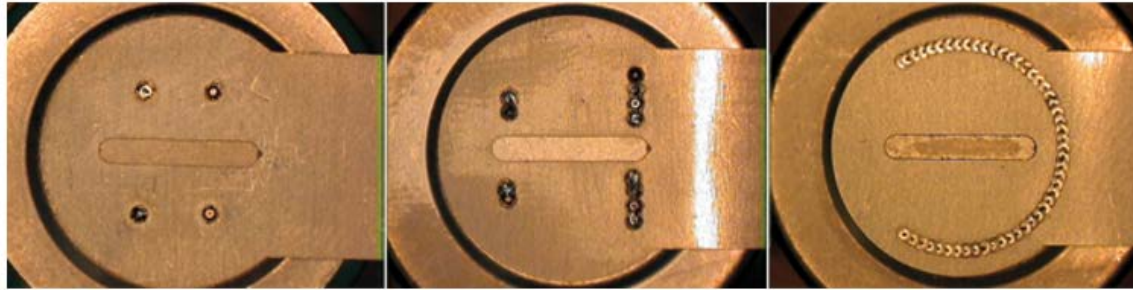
LASER WELDING OF BUSBARS TO CYLINDRICAL BATTERY CANS
